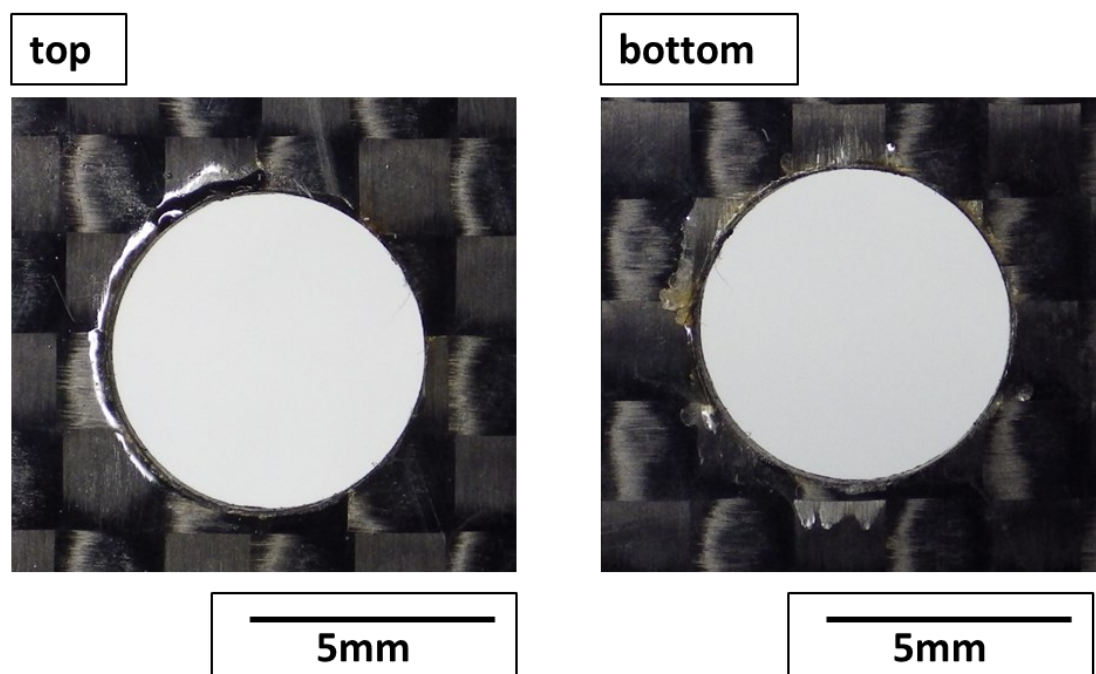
Machined hole surface[500W,0.50mm/s]
